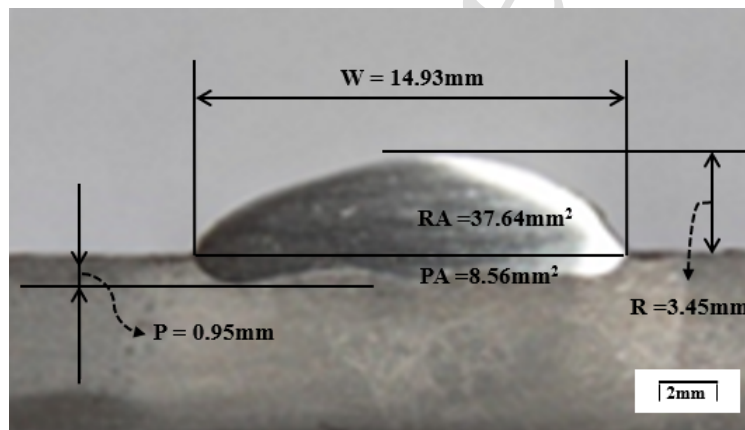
Original photo of the 21-st experimental weld bead
